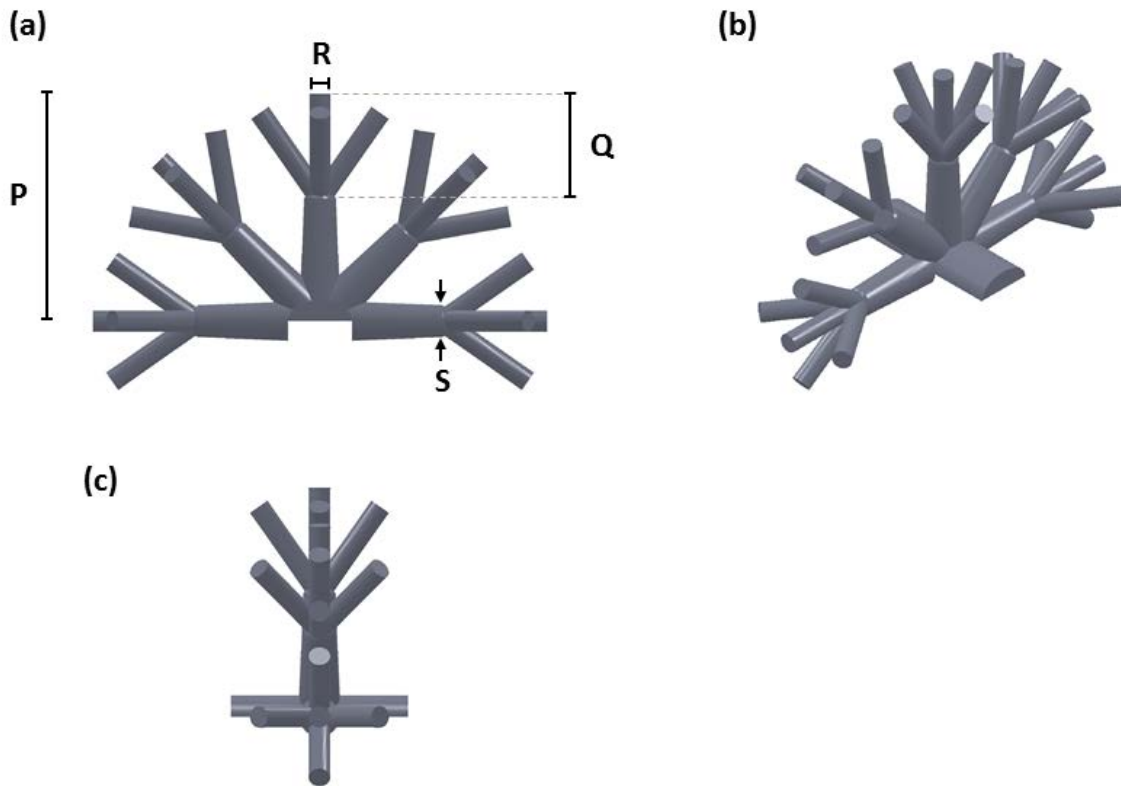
CAD models of cirri showing the (a) front view, (b) isometric view and (c) side view.
